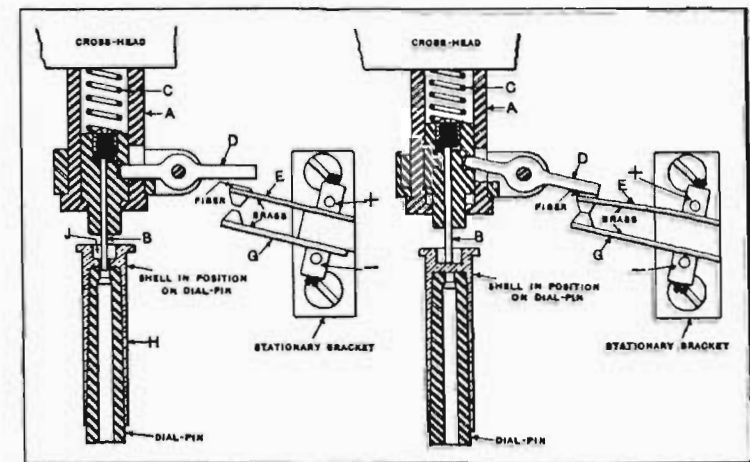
Mechanism for Closing Circuit and Stopping Machine in Case Punch Fails to Pierce the Shell
